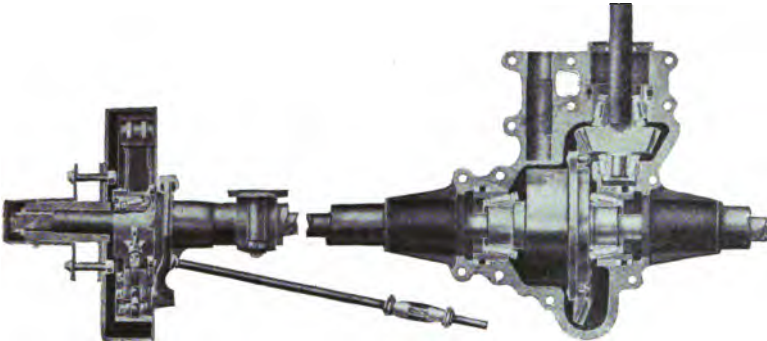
Shaft-Drive Rear Axle, Rear Vertical View at Left, Horizontal View at Right.
